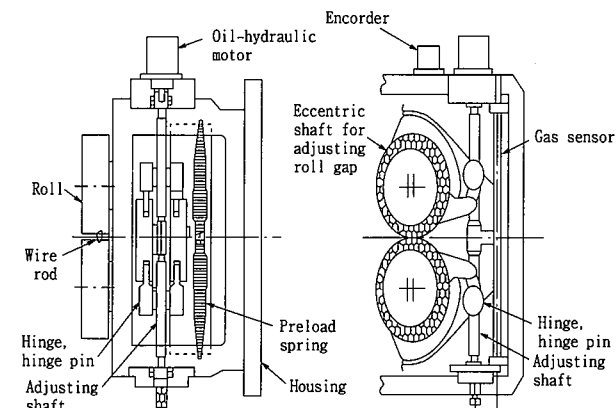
Schematic drawing of the specially designed No-Twist rod finishing mill housing for AGC
